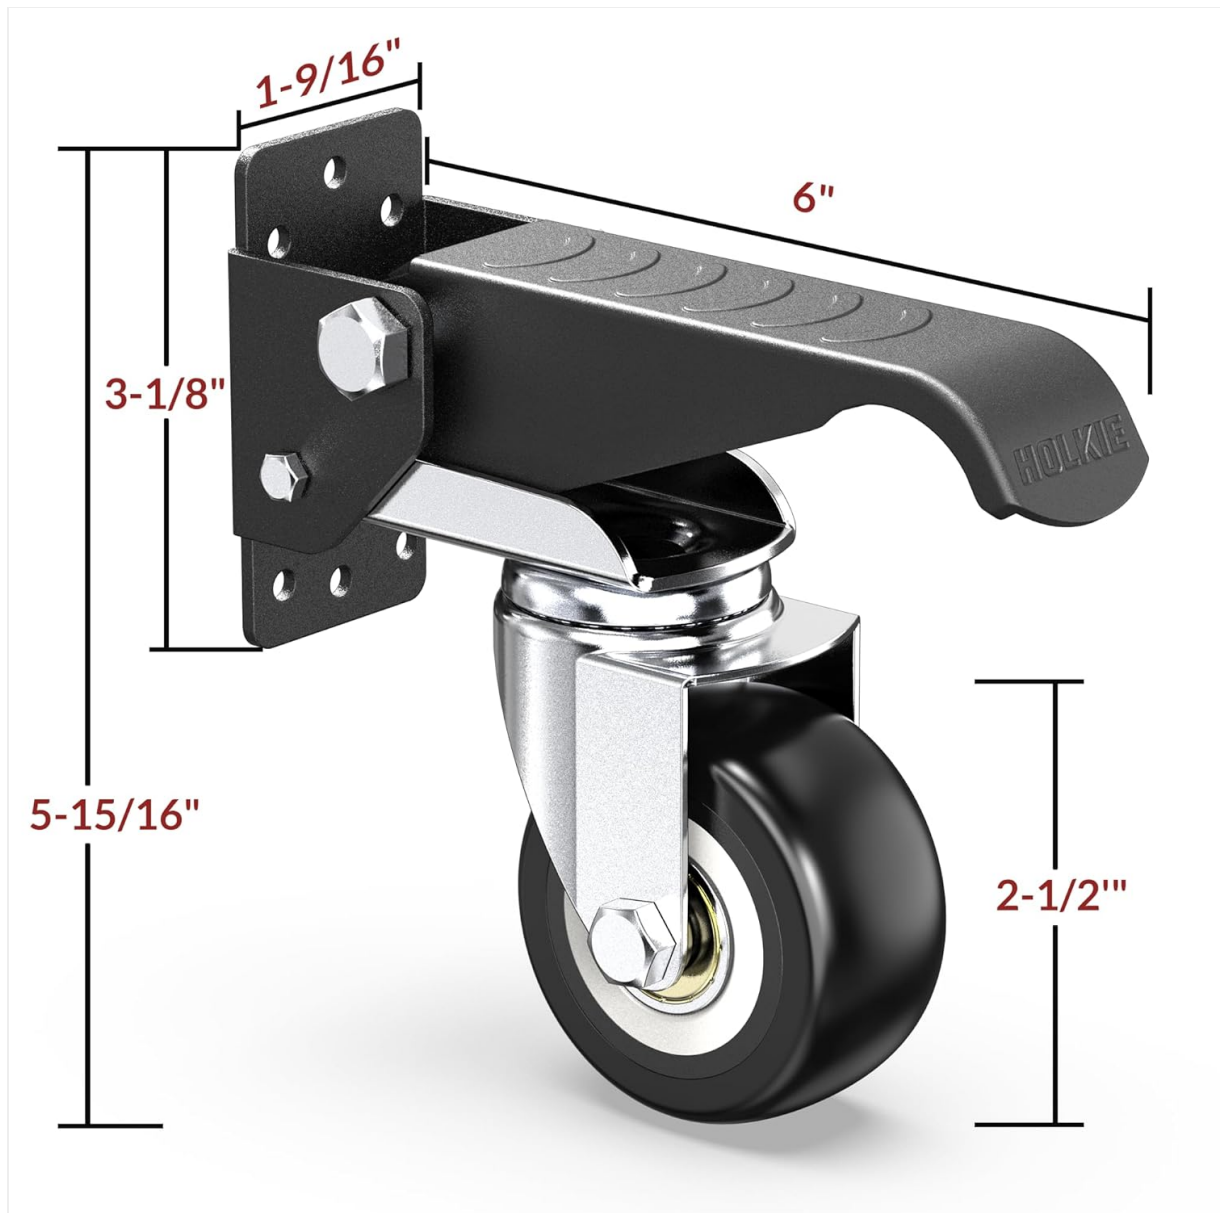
Dimensional overview of the HOLKIE Retractable Caster.
